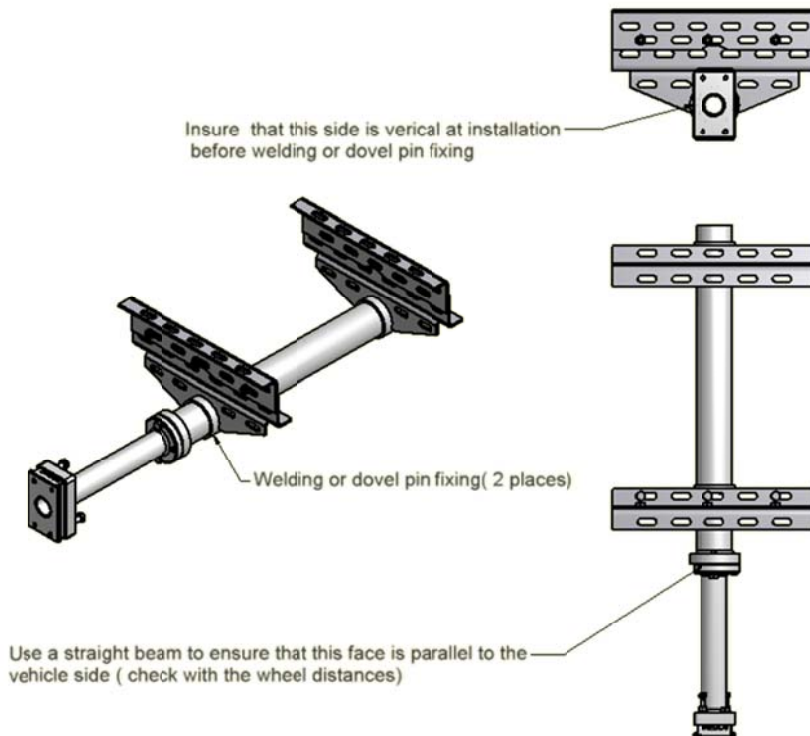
Mounting the fixture on the vehicle. Ensure that the fixture is vertical (in loaded condition) and that the fixture mounting tube is orthogonal to the driving direction.
